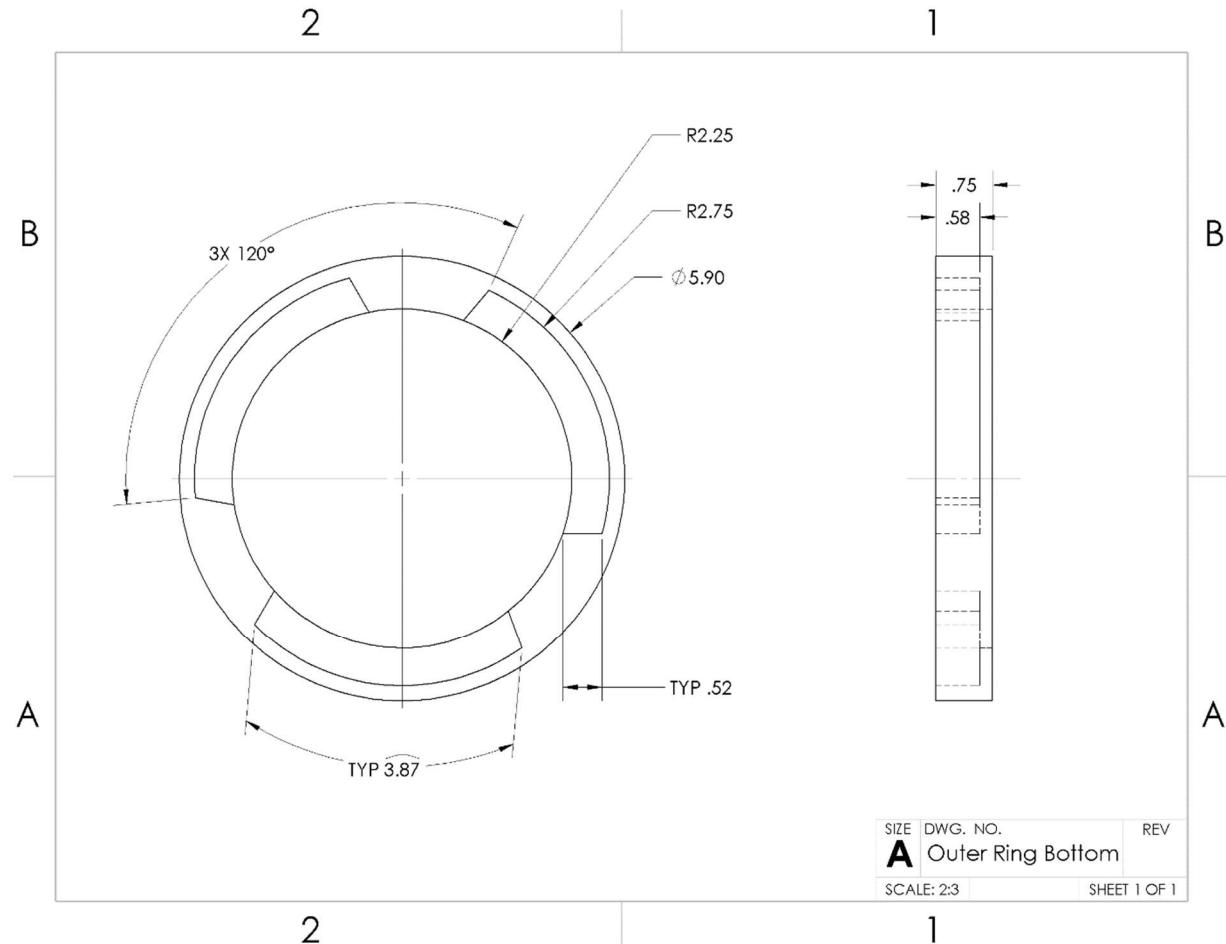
Locking Mechanism Outer Ring Bottom Drawing
